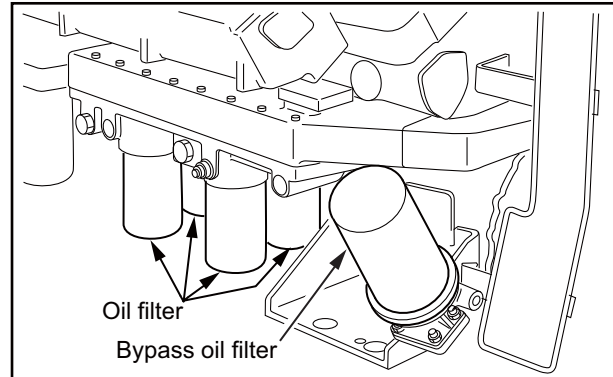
Oil Filter and Bypass Oil Filter - Replace
